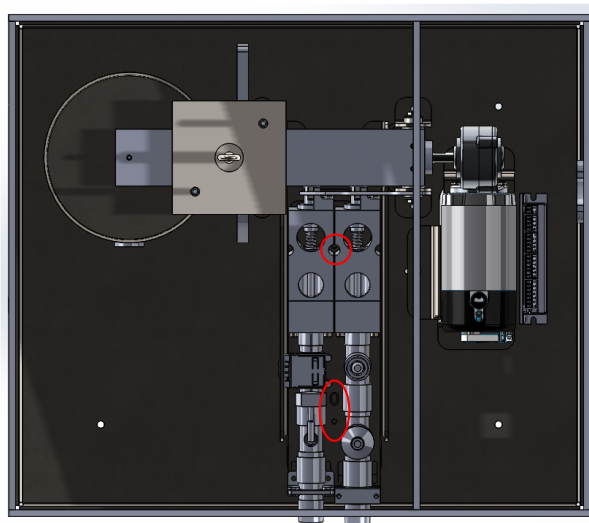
Remove the sensor tubes and main valve assembly by removing the bolts indicated in red
